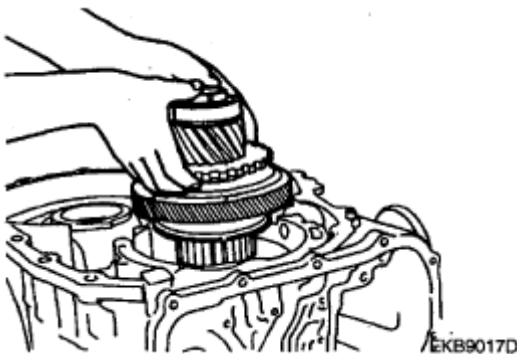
Locating Low & Reverse Brake Discs, Plates And Pressure Plate
